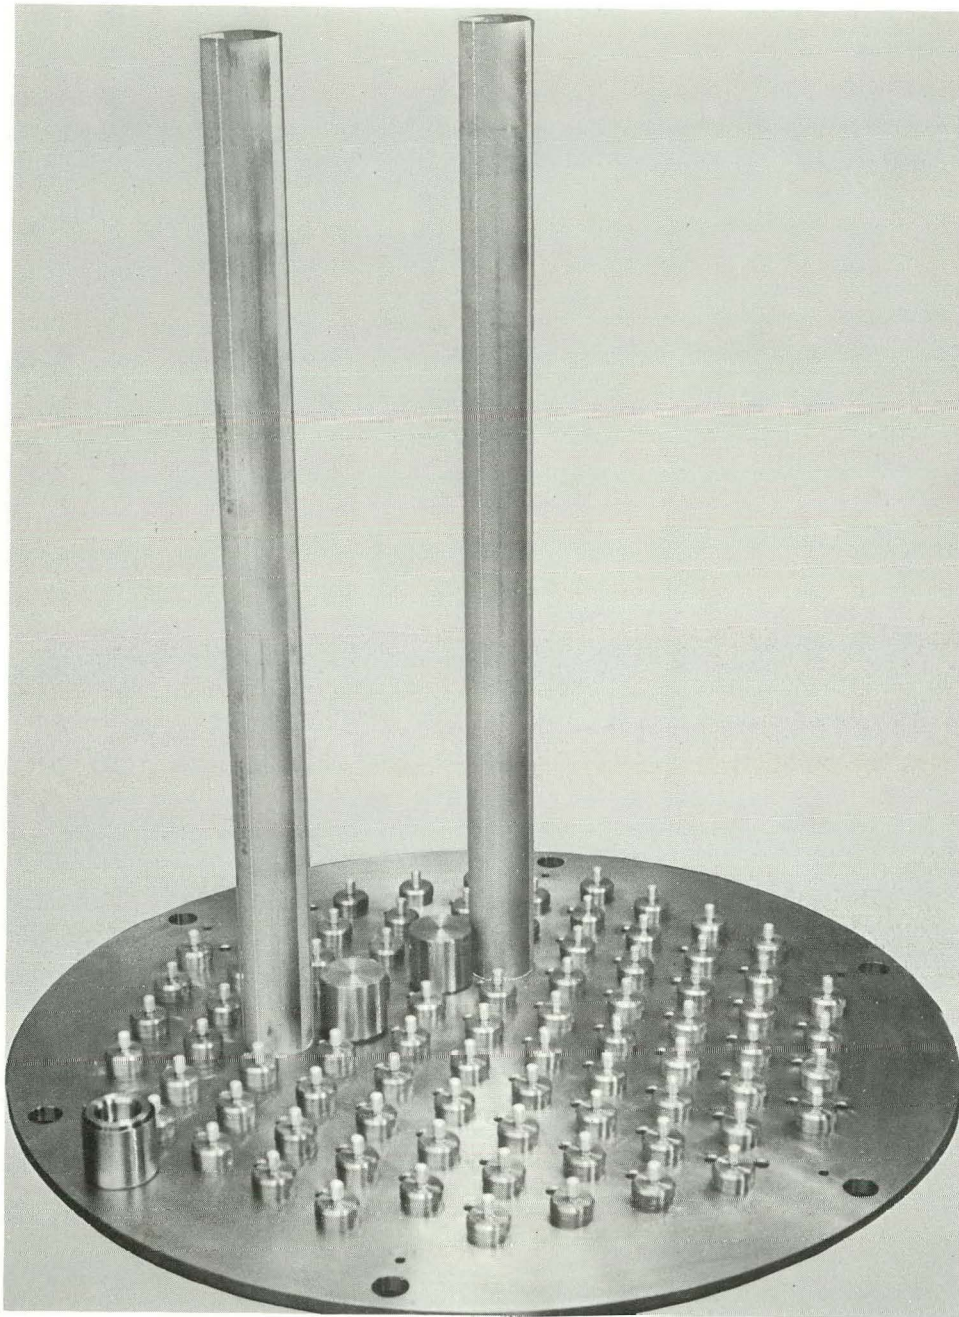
Bottom tube sheet with pilots and fuel tubes assembled to it
